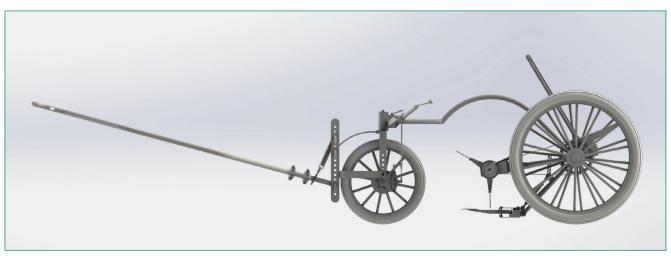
Side view of the horse drawn CombCut coupled to the forecart
